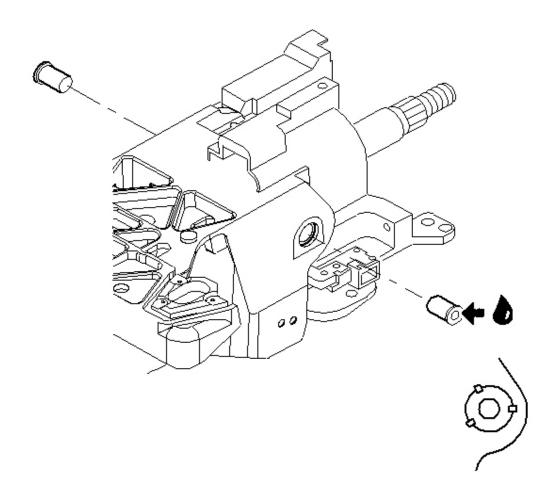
Identifying Pivot Pin Locations Courtesy of GENERAL MOTORS CORP.
